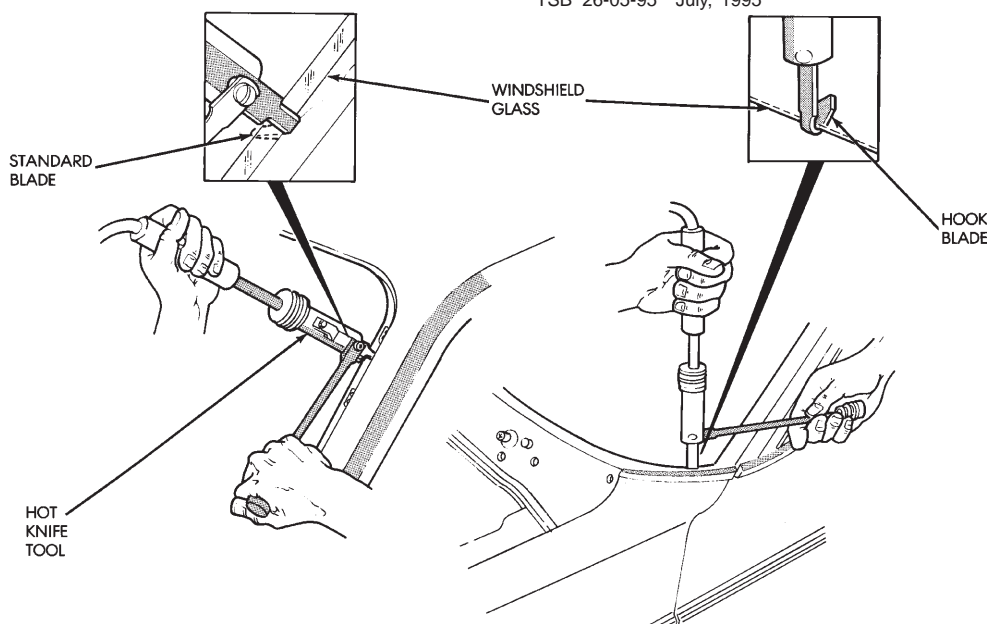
Cutting Glass Urethane Adhesive With Hot Knife
